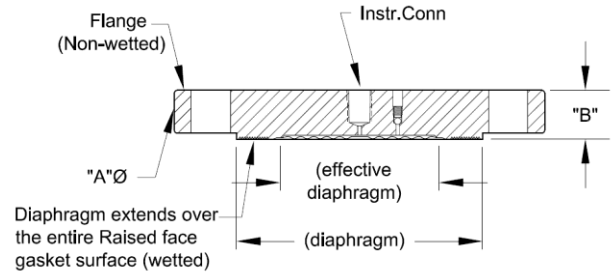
Approximate vertical mounting dimensions for Remote Seal Transmitter
